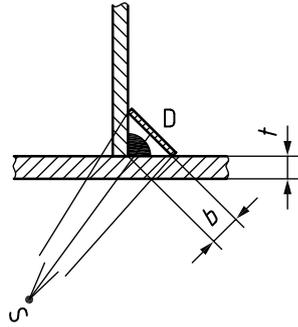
Arrangement for testing of fillet welds with a perpendicular detector position
